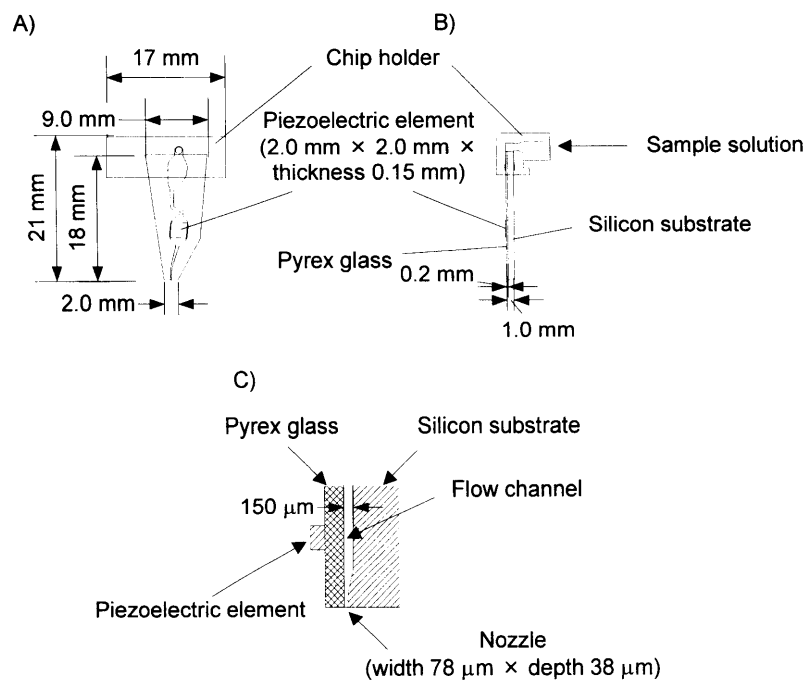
Detail drawing of ink-jet micro chip. A) Elevation view, B) Cross sectional view, C) Enlarged illustration
